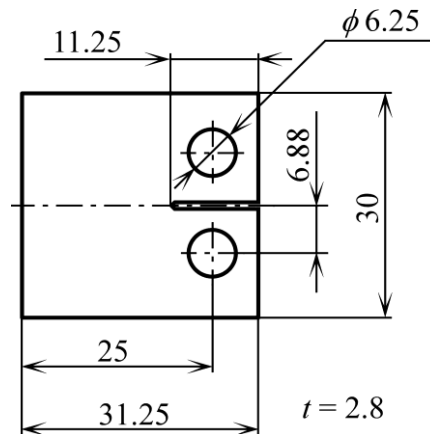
The shape and dimensions of the CT specimen for fatigue crack propagation test.
